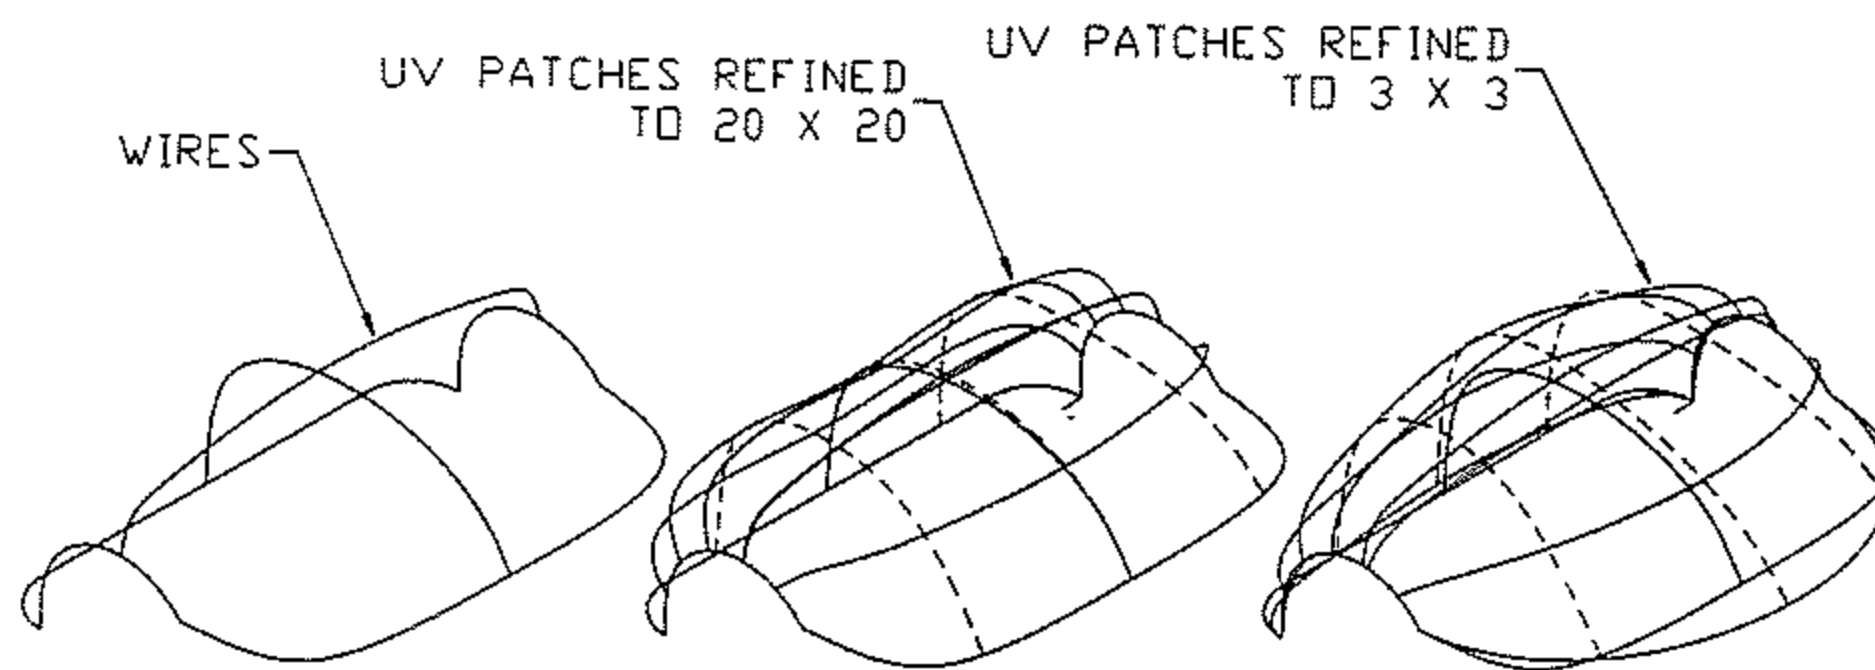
Accuracy of a surface in relation to the number of UV patches
